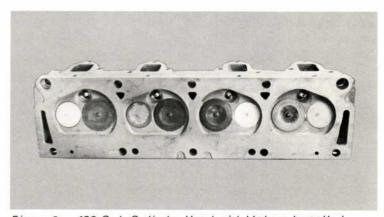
428 C.J. Cylinder Head with Valves Installed
